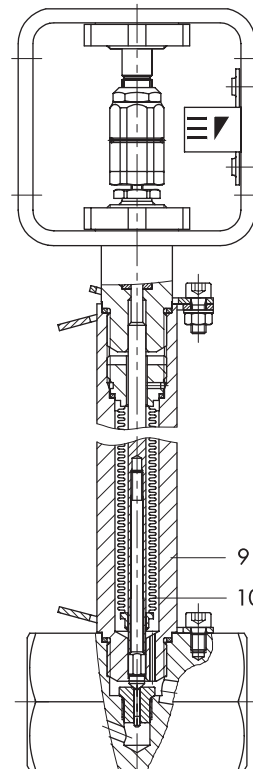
· Type 3510 Valve, globe valve with metal bellows seal
